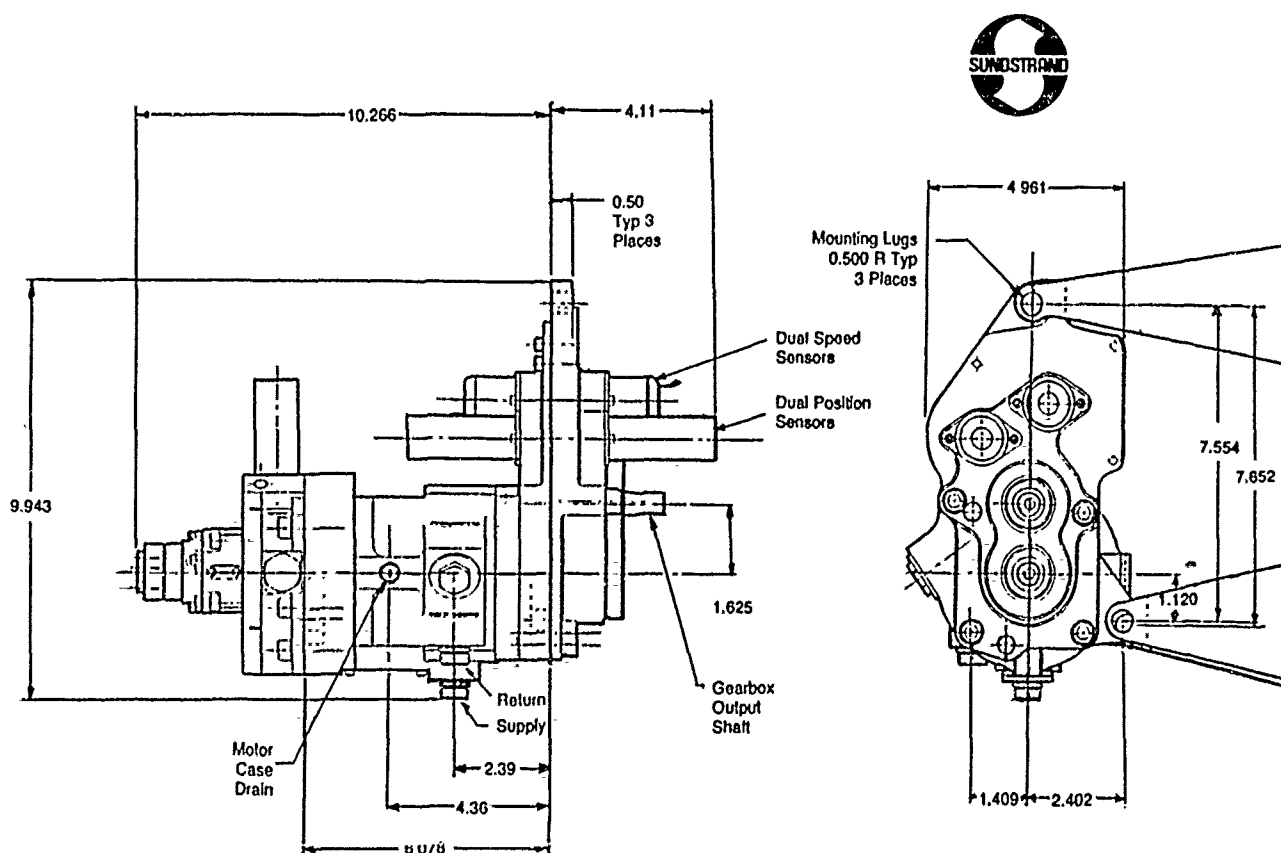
Sundstrand - Leading Edge Flap (LEF) Power Drive Unit Outline Drawing
